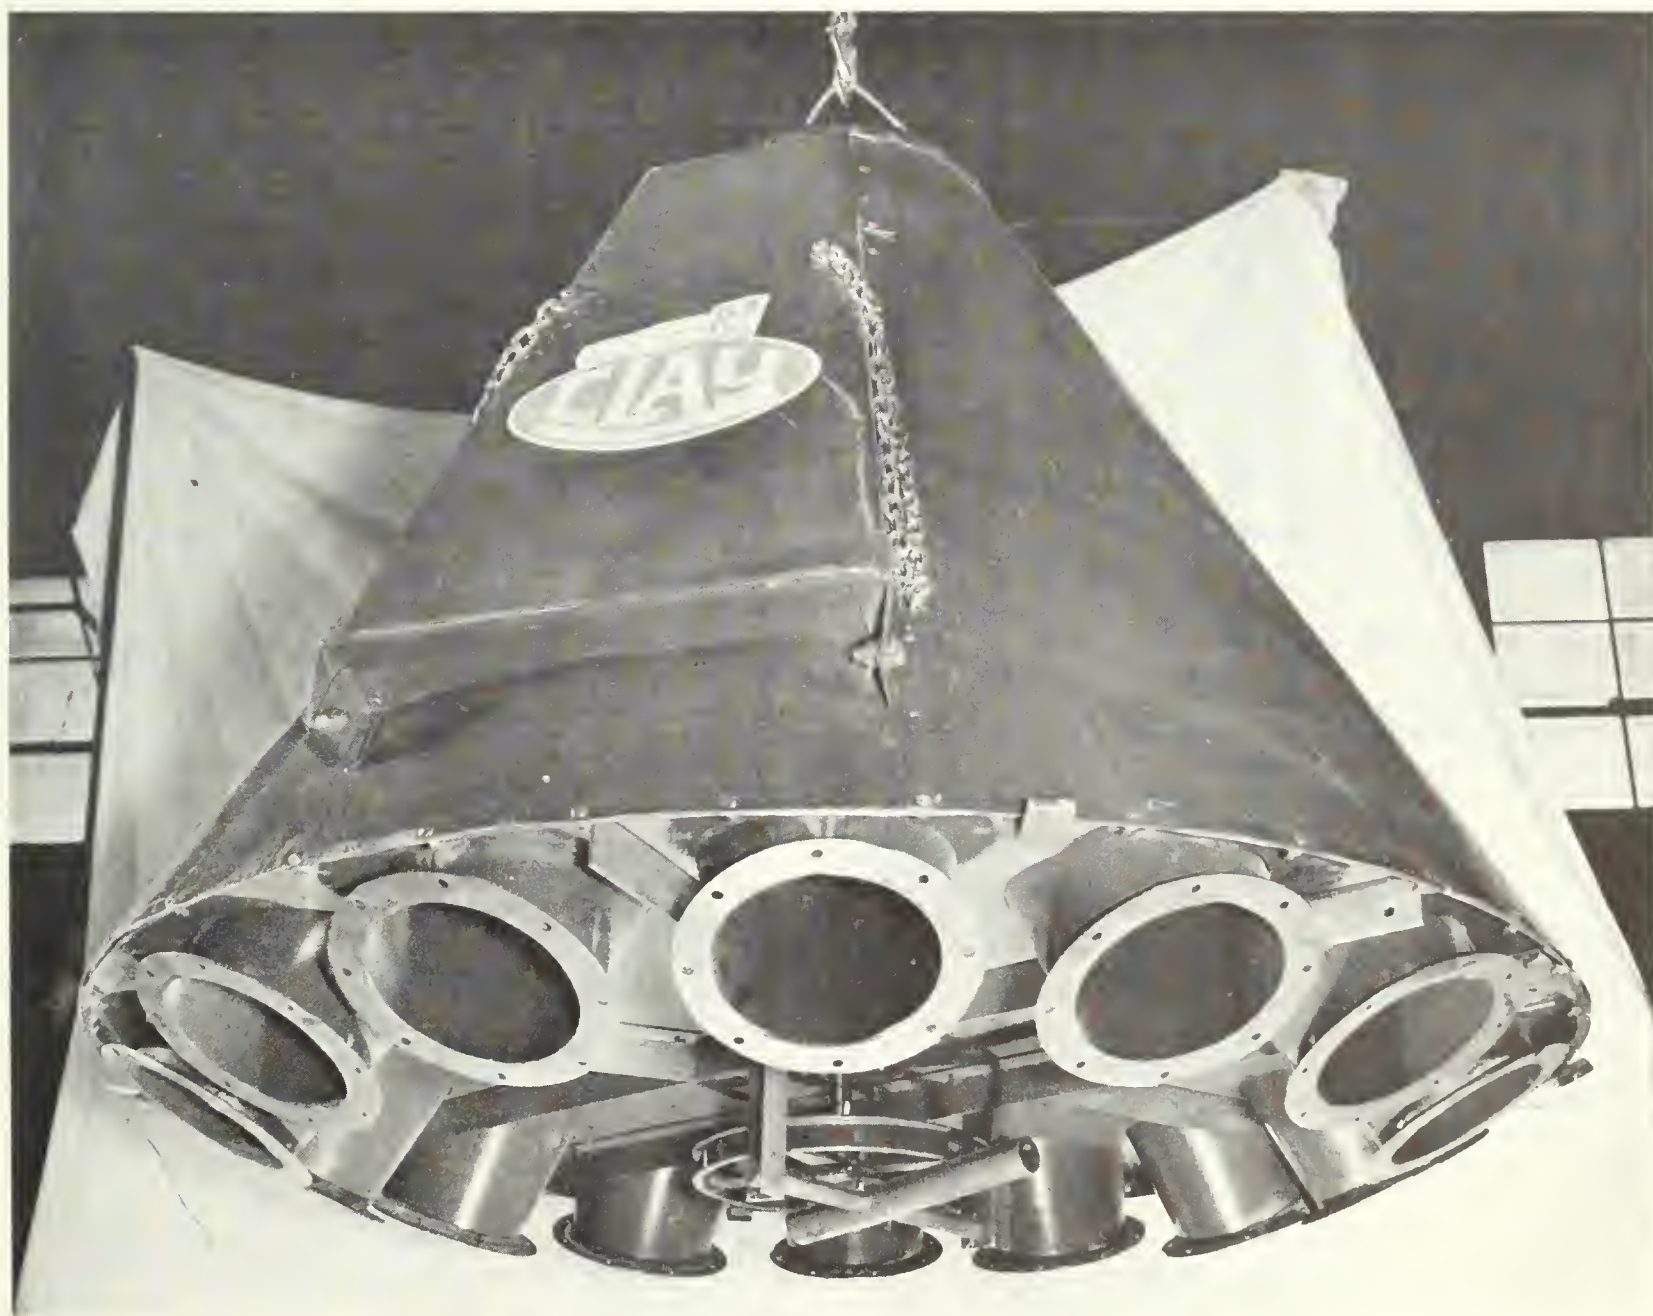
Large distributor. Courtesy: Clay Equipment Corp.
